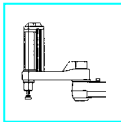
HMZ(W)-S270 Z-Axis Motor Unit Replacement 2
